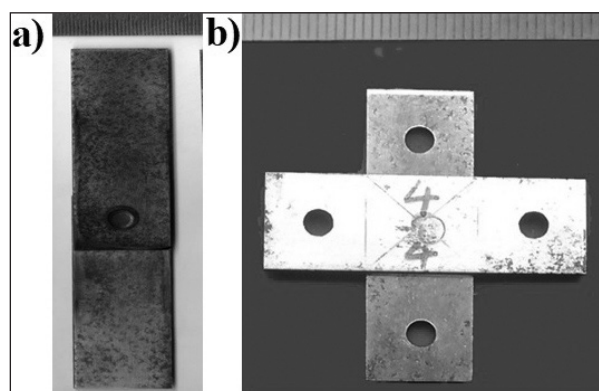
Photograph of typical TSFL specimens of RSW DP800 steel joints: a) LAP-TSFL; b) CROSS-TSFL
